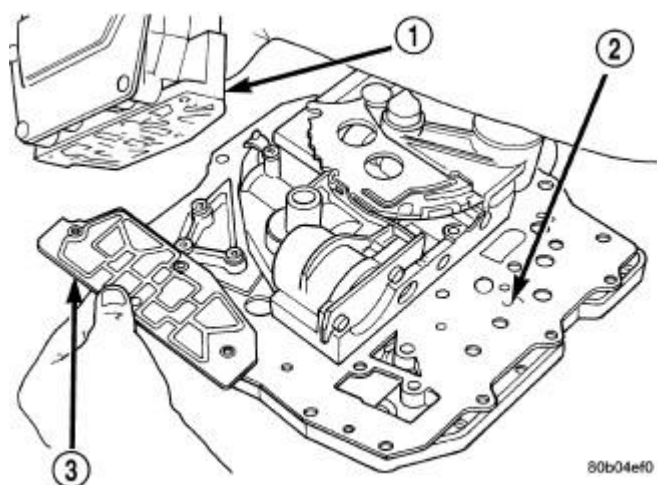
Solenoid/Pressure Switch Assembly & Screen
